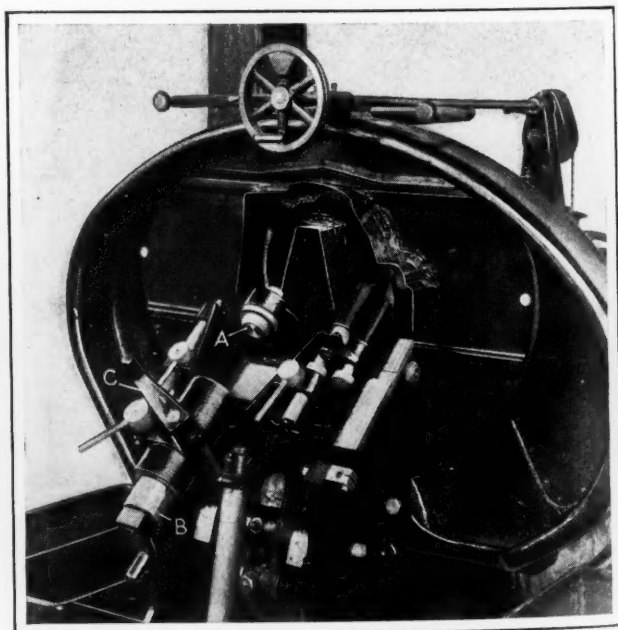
Equipment Shown in Fig. 6, with the Work Removed and the Table Inclined for Loading
